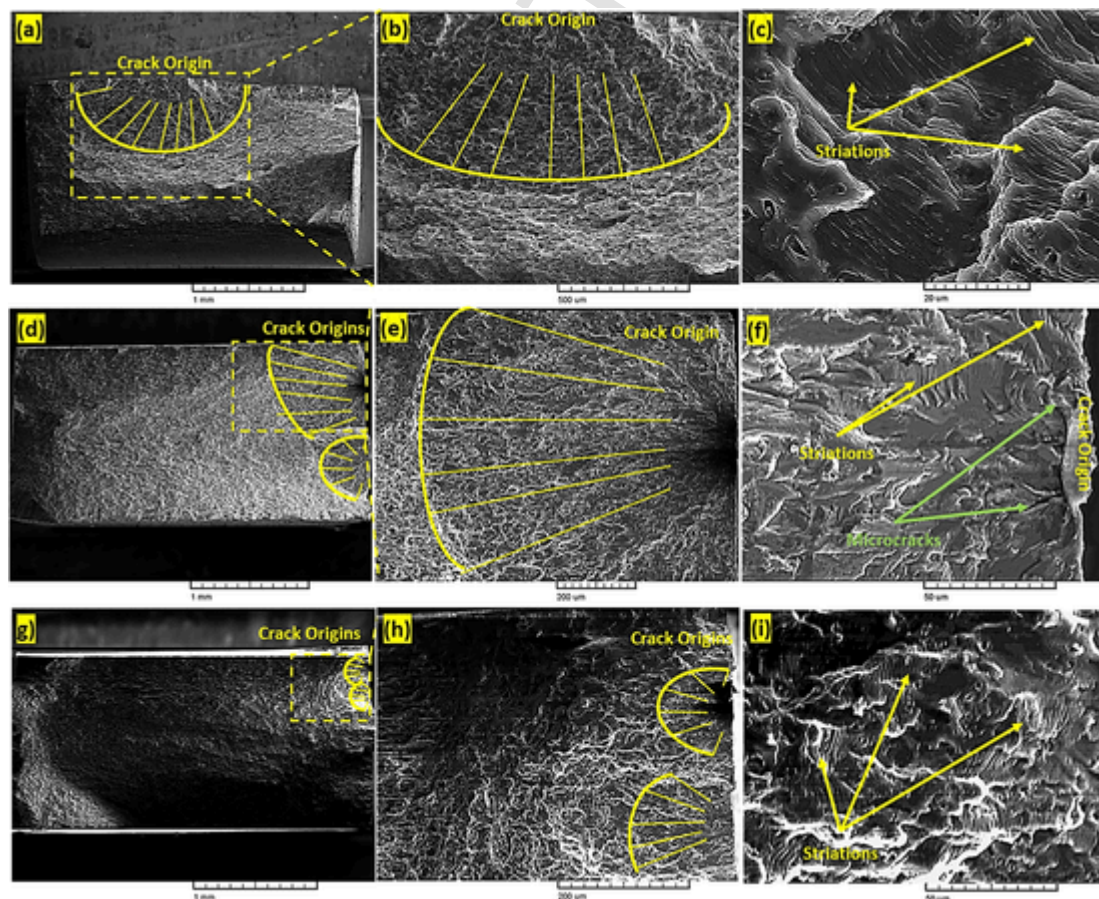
Fracture surfaces of (a–c) AA6082 specimen formed in tool with temperature of 350 °C and fatigued at 0.6%, (d–f) AA7075 as-received specimen fatigued at 0.4%, (g–i) AA7075 as-received specimen fatigued at 0.6%; higher magnifications of fracture are displayed to the right.
